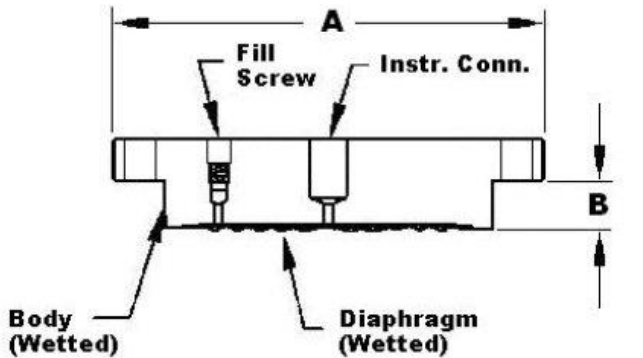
Seal Dimensions (Chemical TEE "Taylor Wedge" Seals)
